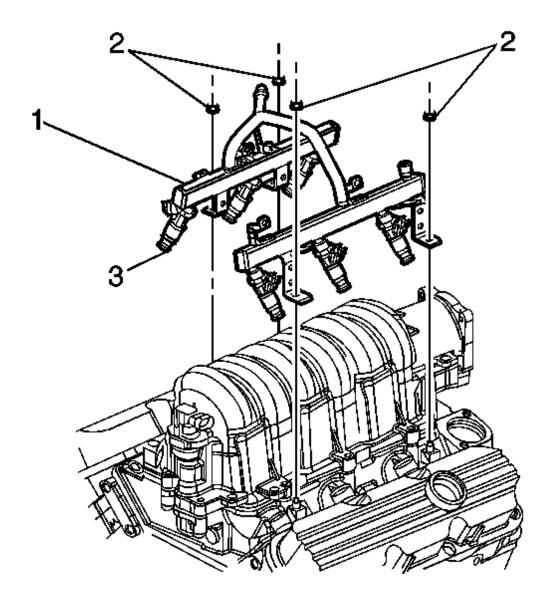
Fuel Rail Assembly & Fuel Injectors Courtesy of GENERAL MOTORS CORP.
